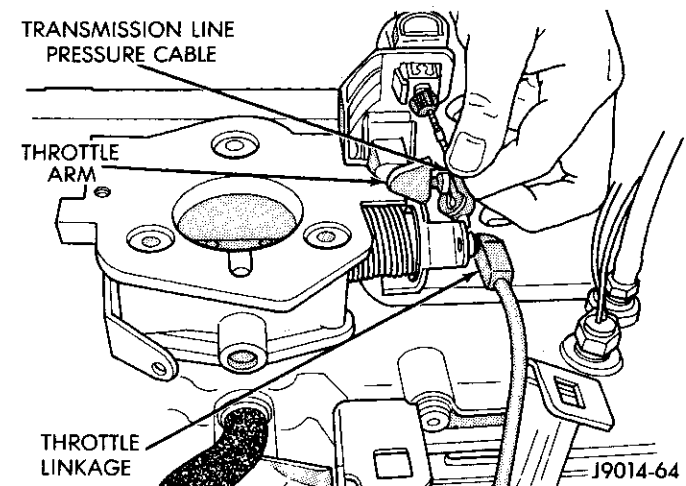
Throttle Linkage and Transmission Line Pressure Cable
